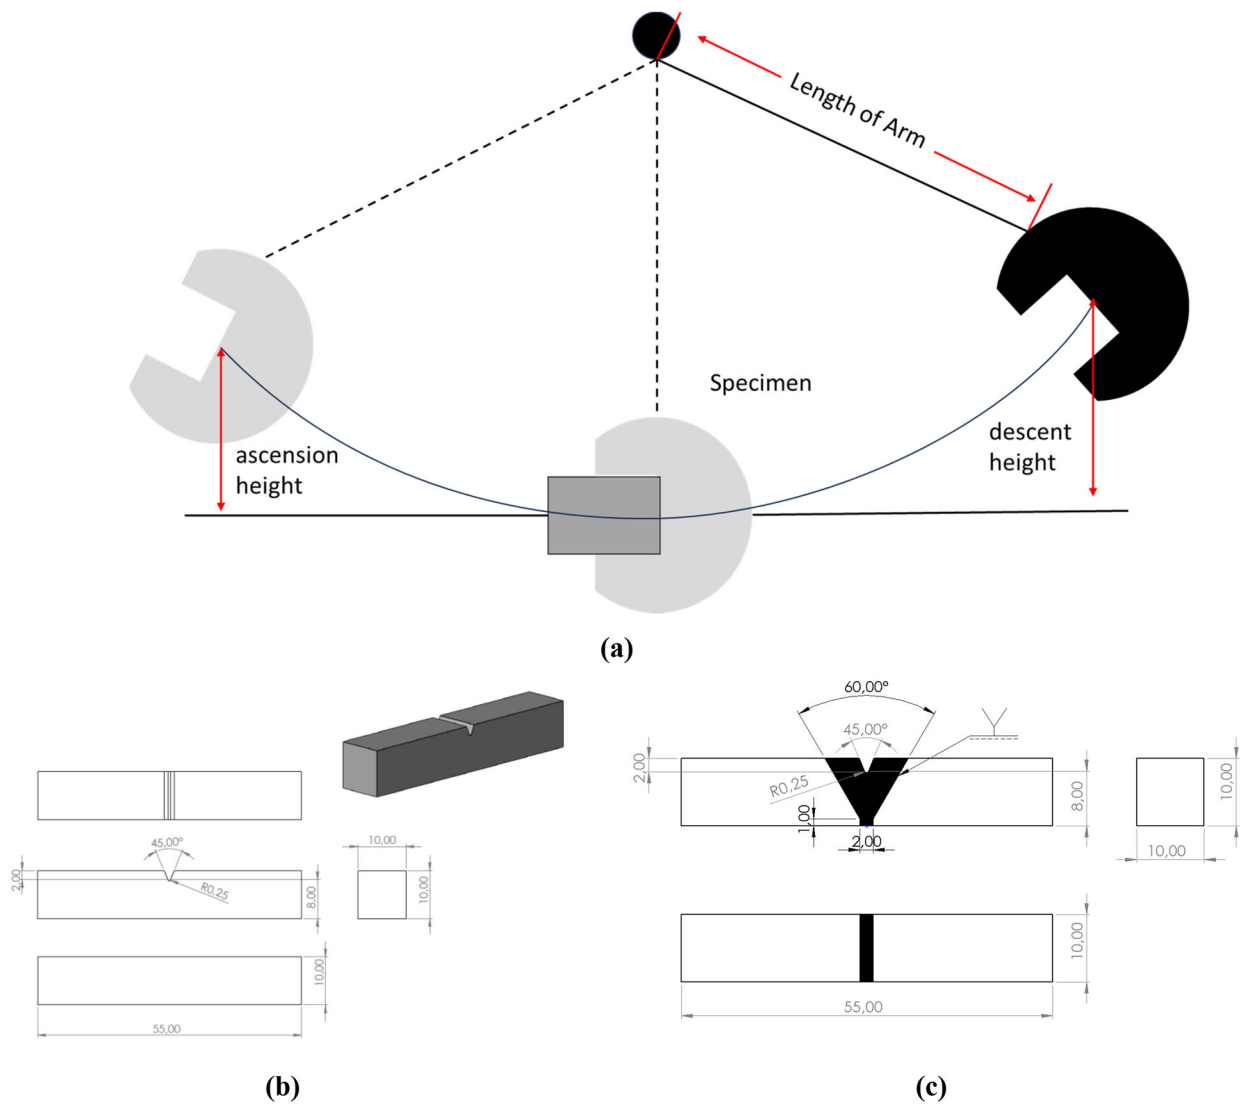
The schematic of (a) impact testing using Charpy V-Notch and The impact specimen JIS Z 2202: (b) without welded and (c) welded.
